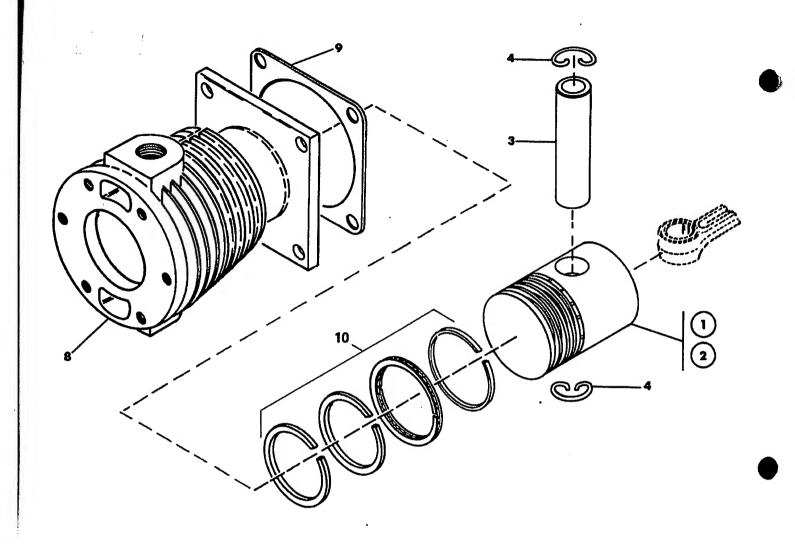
5 1/2 INCH DIAMÈTER PISTON AND CYLINDER ASSEMBLY
